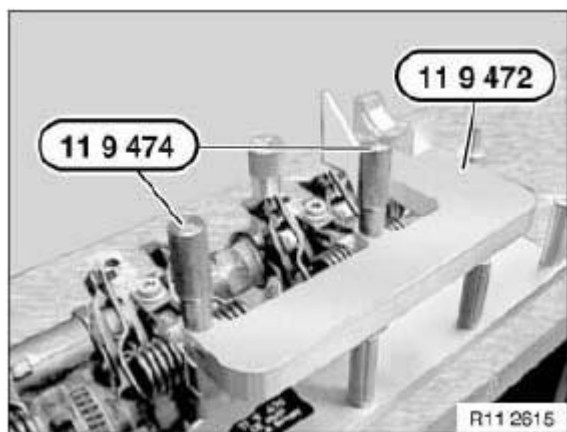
Identifying Special Tool (11 9 474) And (11 9 472)
